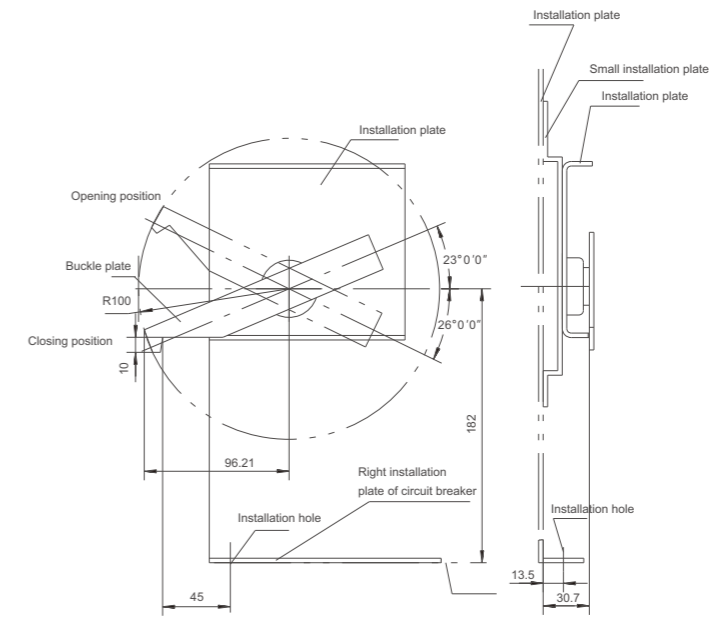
NA8-2500~4000 fixed type circuit breaker status door interlock installation dimensions
